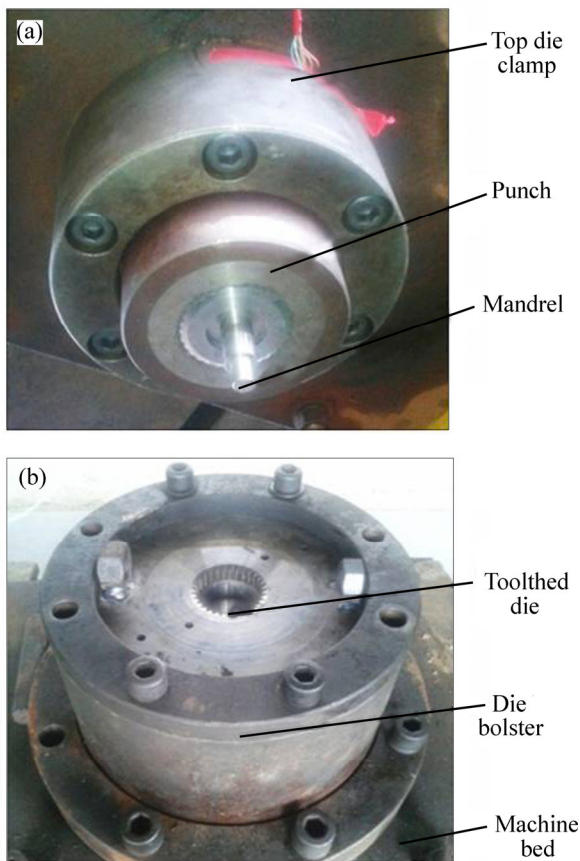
Gear forging tool set: (a) Top part; (b) Bottom part
